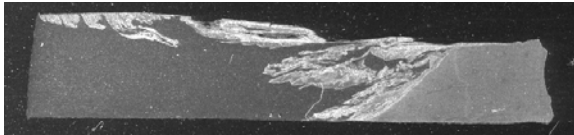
(c): Macrograph of weld produced at 950 rpm and 300 mm/min
